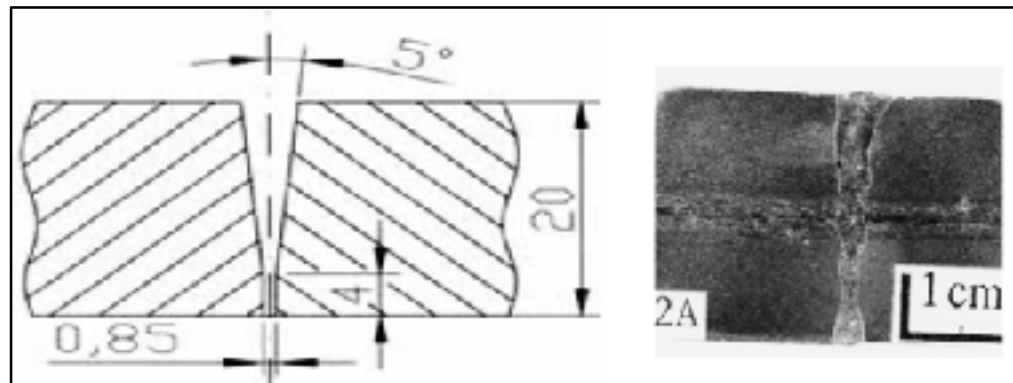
Groove design and Cross section of the hybrid weld with thickness of 20 mm filled with four passes (Jokinen et al., 2003a)
